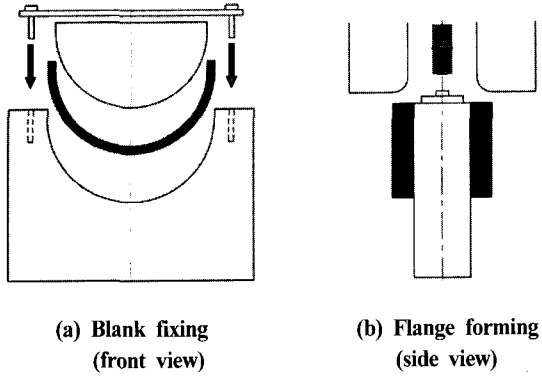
Fixing and flange forming process of a U-bent Steel-Al blank
